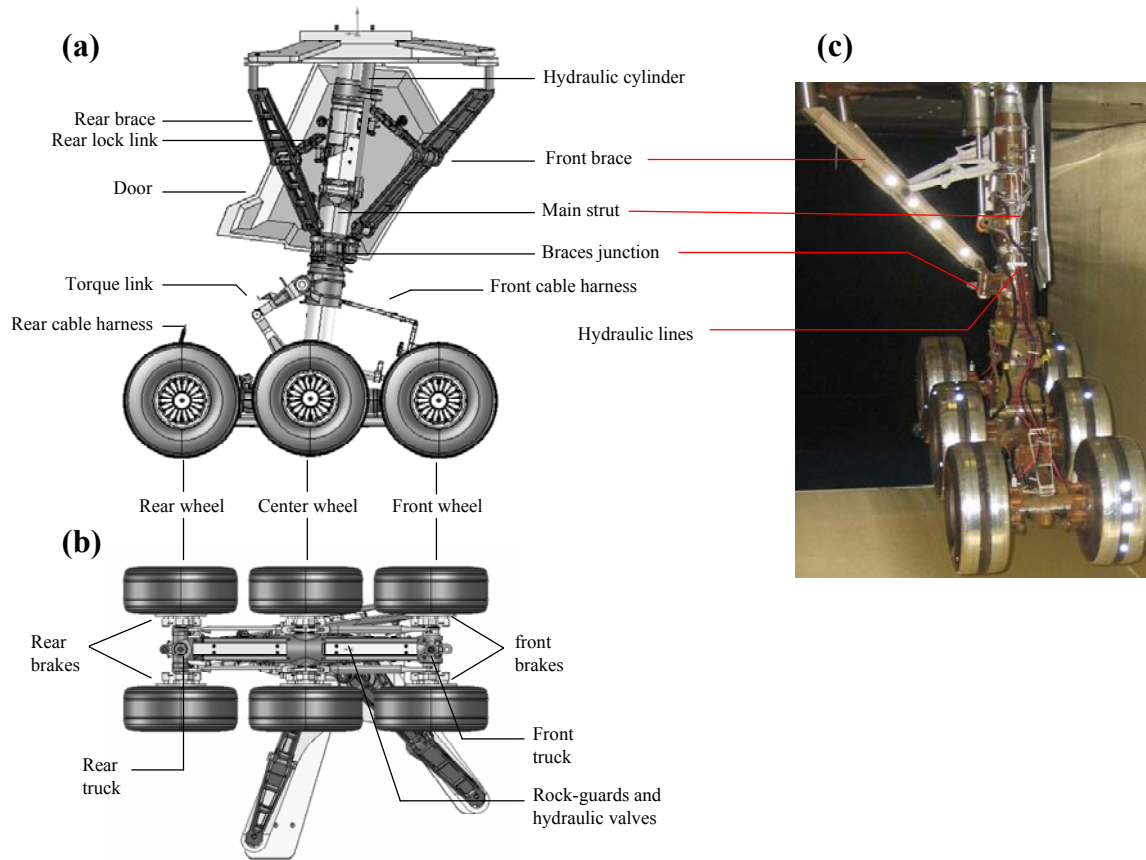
CAD drawings, braces-side view (a) and bottom view (b), and a photograph (c) of the high fidelity 26%-scale Boeing 777 main landing gear model.
